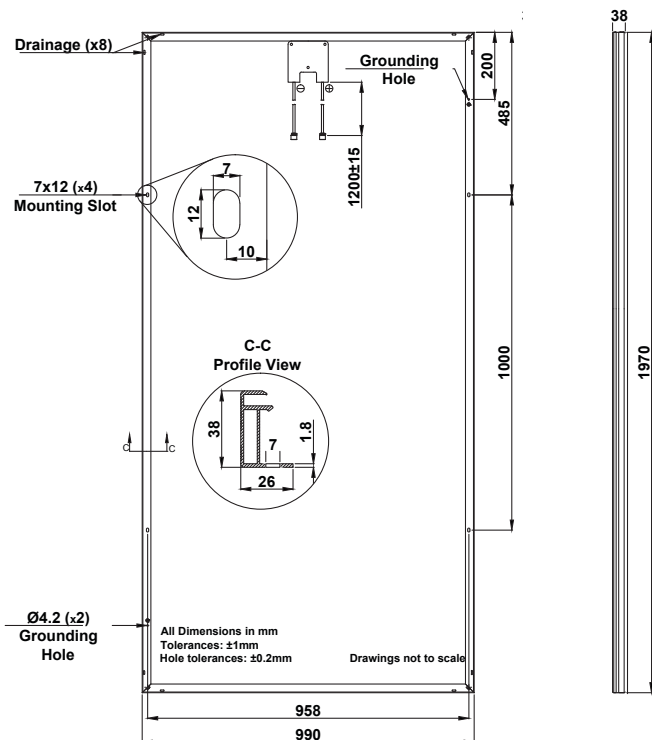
Mechanical drawing of the SLG/SSG module showing the mounting holes, the drainage holes, and the ground connection holes
